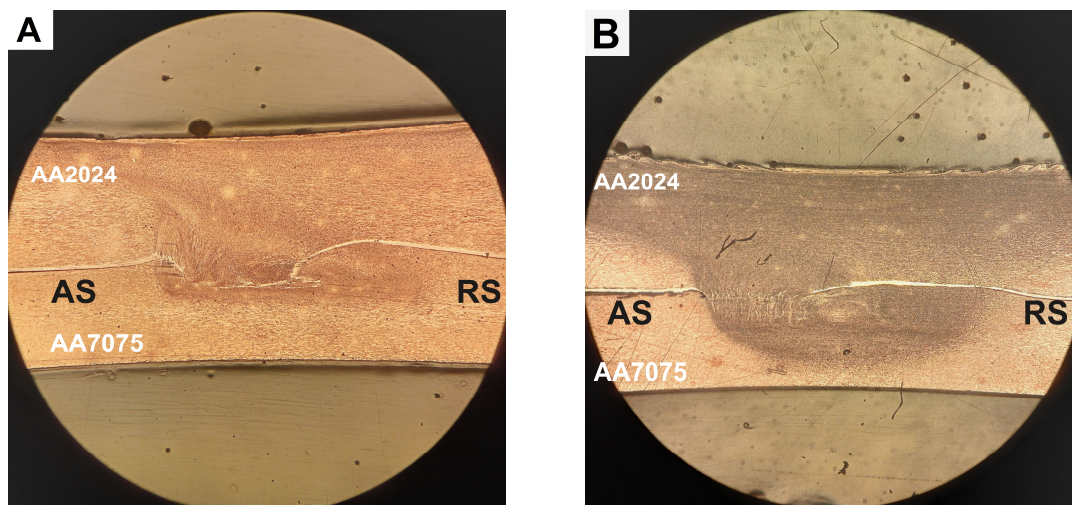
Cross-section of the FSW Lap Welds (X25): A (30 mm/min), B (6mm/min)
